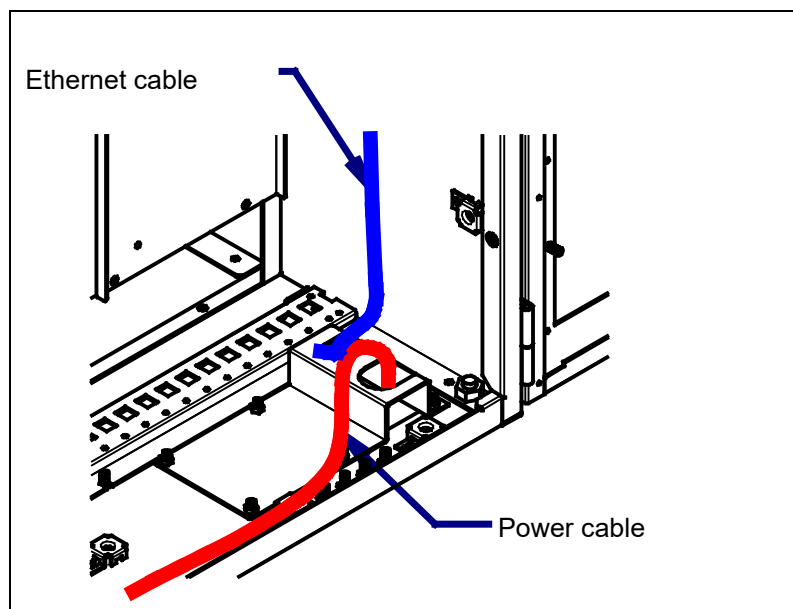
(b) Remove cable fixation sheet metal and welding power supply fixation bolt
